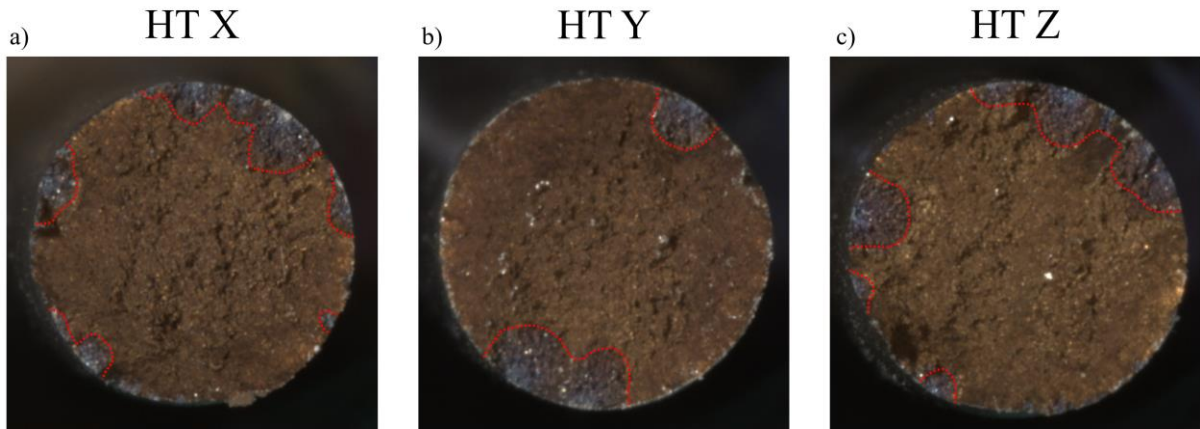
a) HTX ETT fracture surface. b) HTY ETT fracture surface. c) HTZ ETT fracture surface. All sample demonstrate similar oxidation patterns and regions of intergranular failure.
